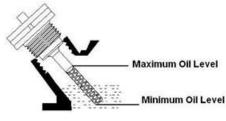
Oil Fill Opening, Dipstick and Oil Level
